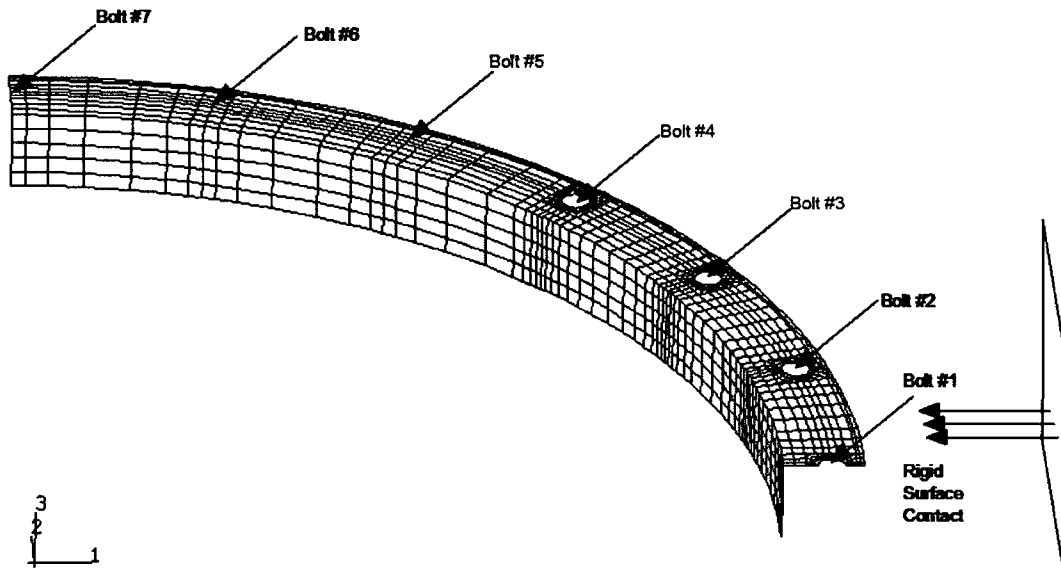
Finite Element View of Drum Flange, Showing Closure Screw Numbering Scheme and Location of Rigid Surface.
